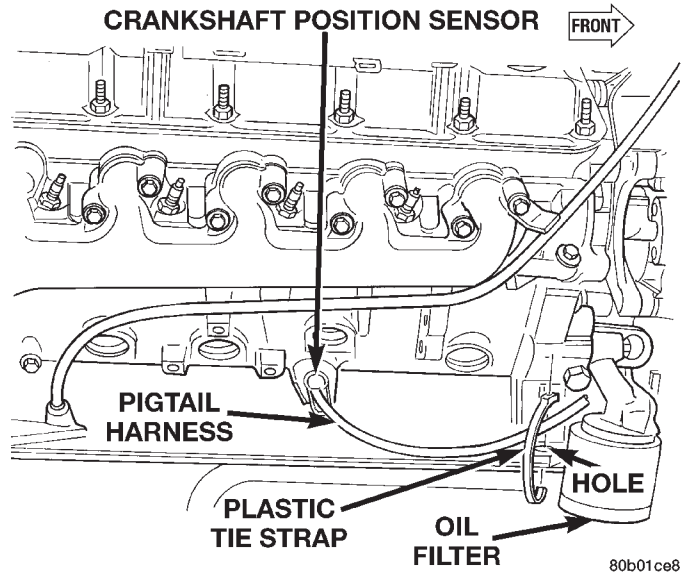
Crankshaft Position Sensor Location—8.0L V-10 Engine
